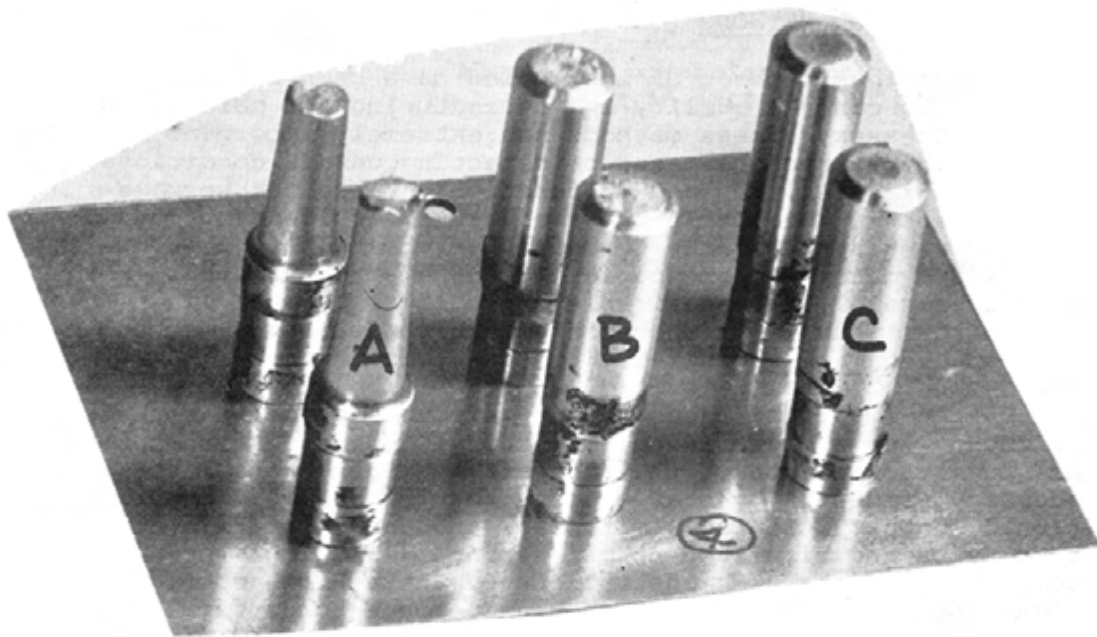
A-40 Fatigue failure of rotating beam specimens
